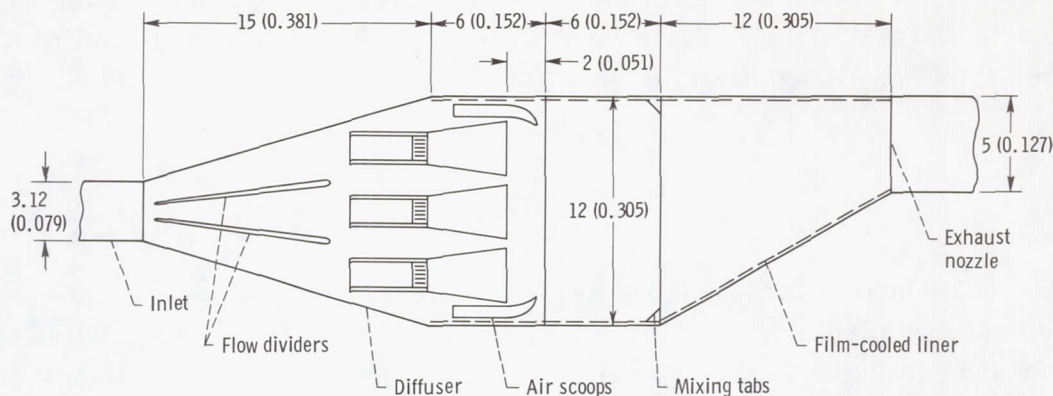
Combustor installation in test section. (Dimensions are in inches (m).)
